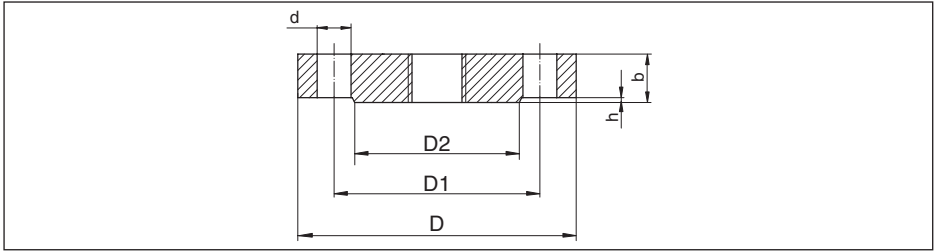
Dimensions: GOST flange (GOST 12815-80, Modification 1)
